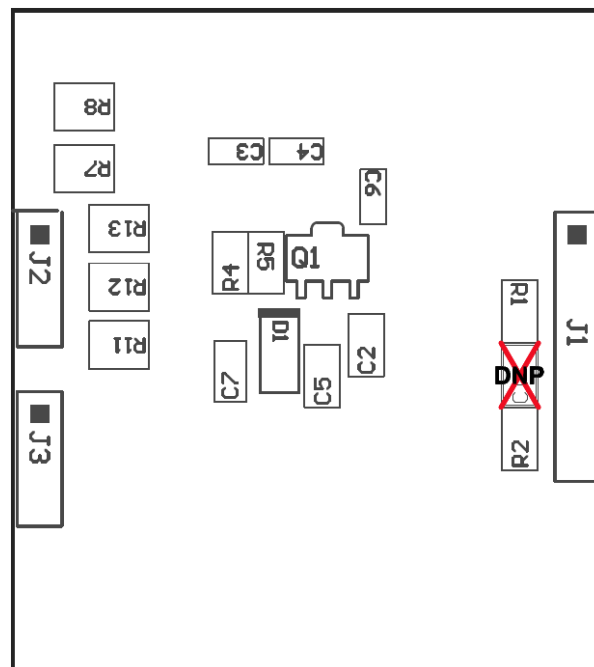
UCC27532EVM-538 Top Layer Assembly Drawing (top view)
